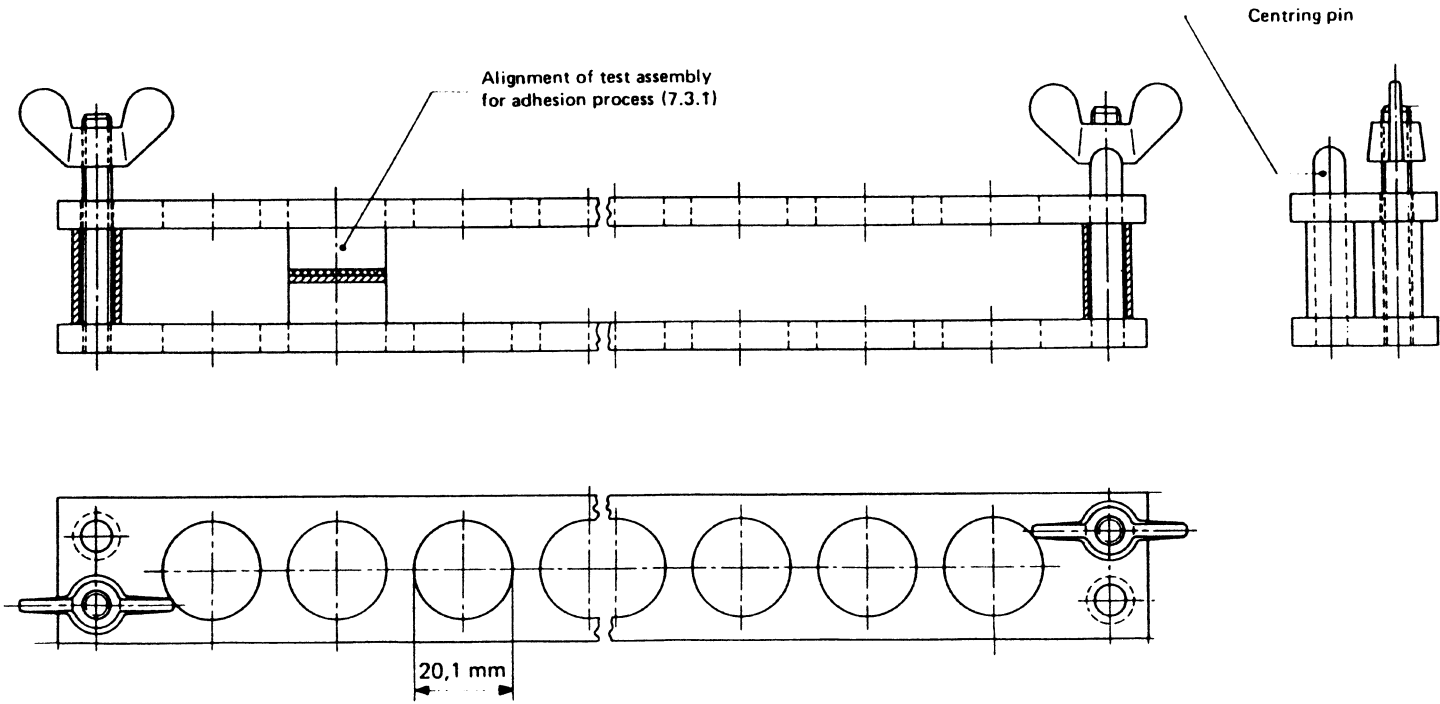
Example of suitable centring device for 20 mm diameter test cylinders
